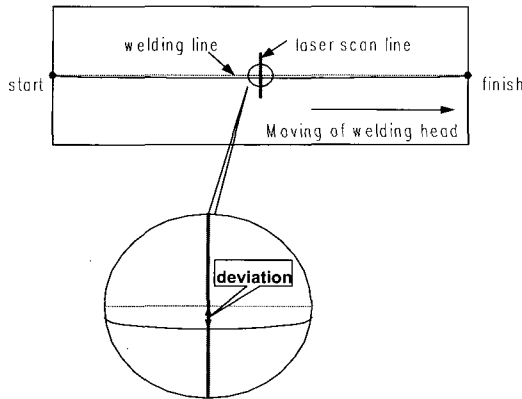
Error and deviation in longitudinal welding line of tube
